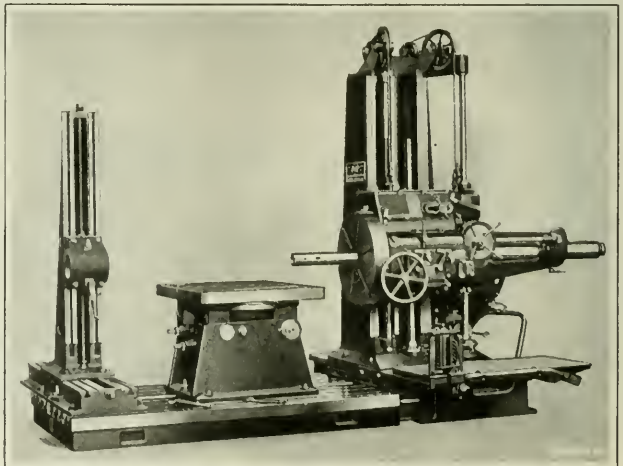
Boring, Drilling, and Milling Machine built by the Pawling & Harnischfeger Co.
